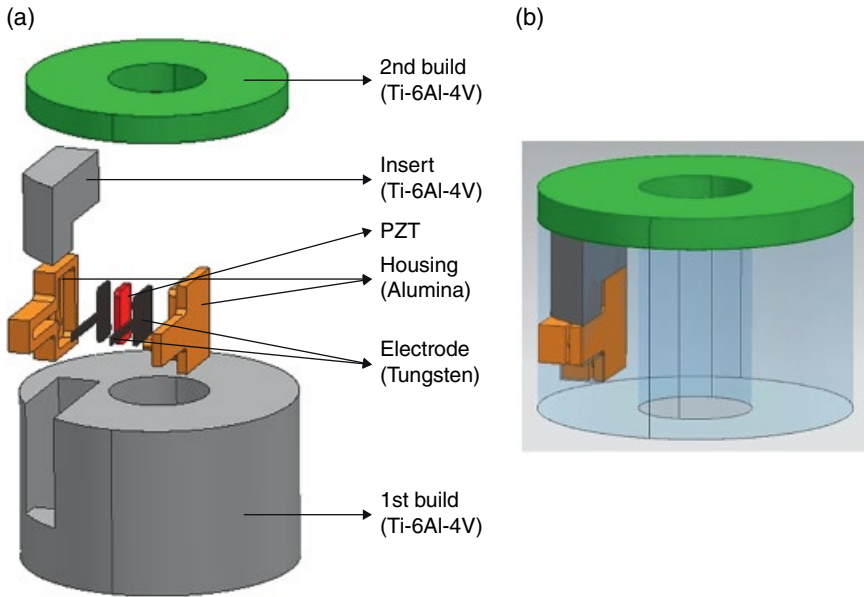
Exploded (a) and assembled (b) schematic view of the “smart coupling” design.
